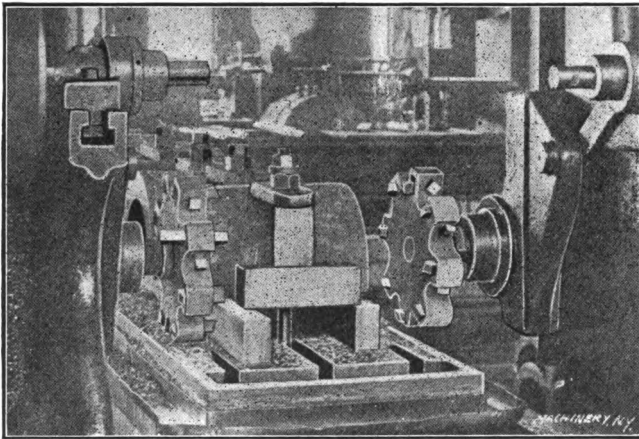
Enlarged View showing the Two Inserted Tooth Mills
